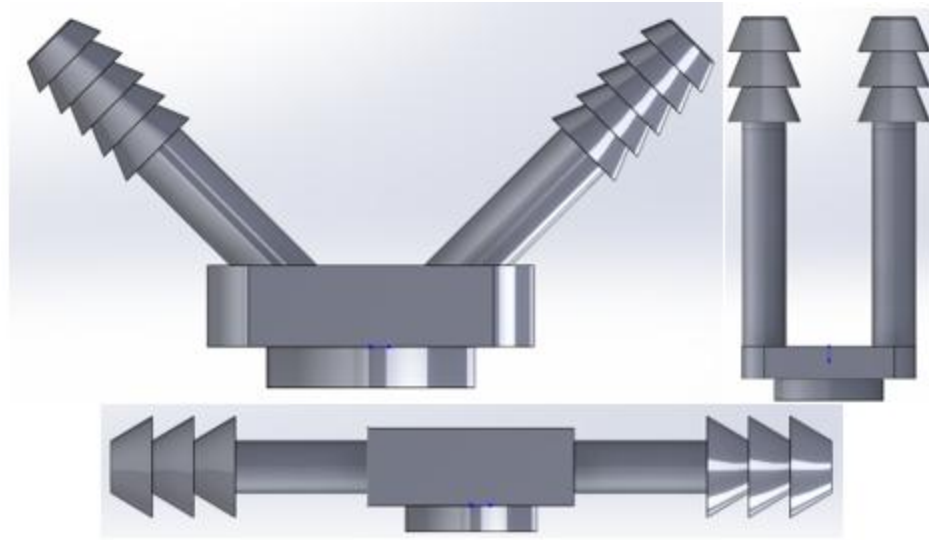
Prototype Hollow Fiber Tube Fittings
